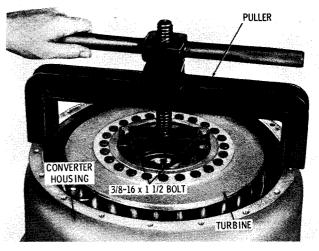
Removing (or installing) turbine and pump bearing retaining snapring
